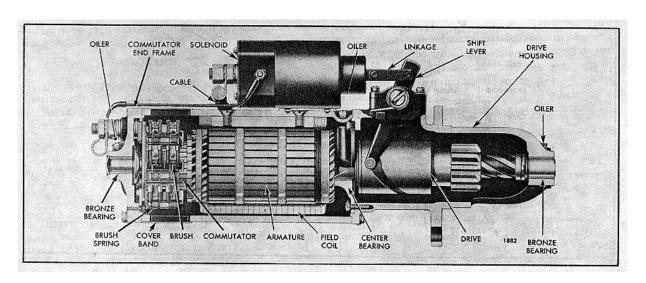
Cross-section of Starting Motor with Dyer Drive
